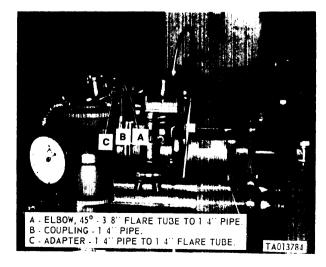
Fuel injection pump on test stand shouting improvised manifold for nozzle tester.
